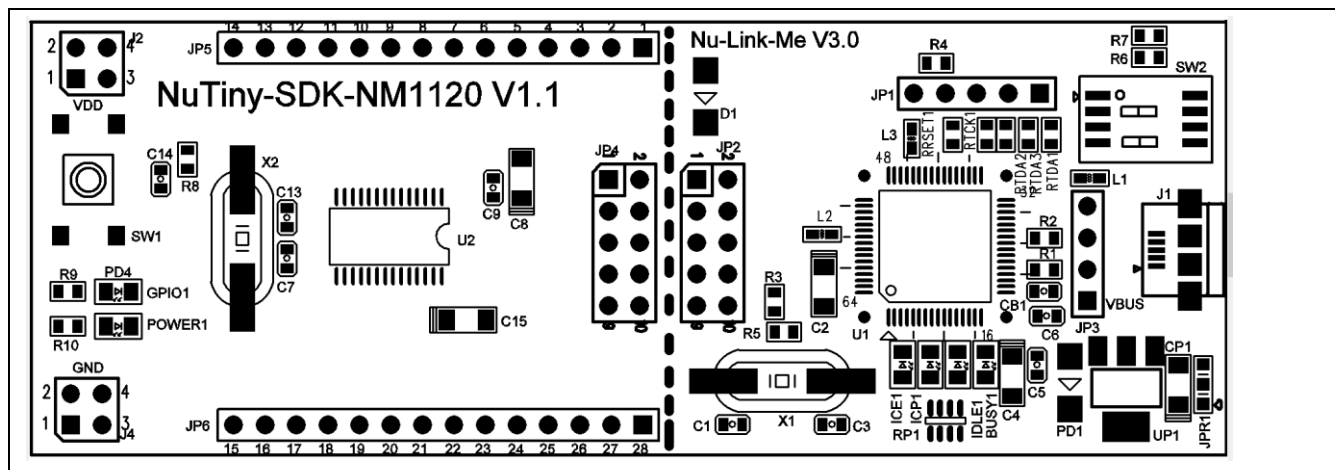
NuTiny-EVB-NM1120 PCB Placement
